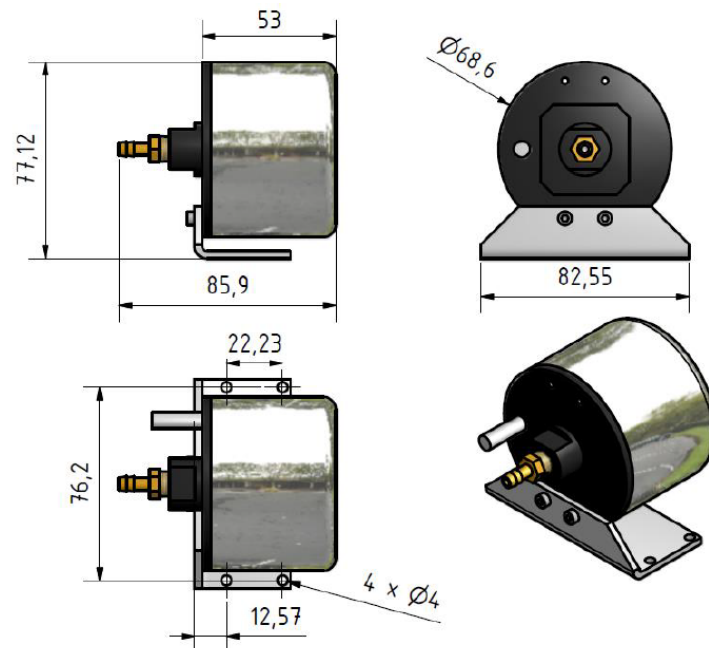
Absolute pressure sensors Setra 270 (dimensions in mm) (Cremer, 2016g)
